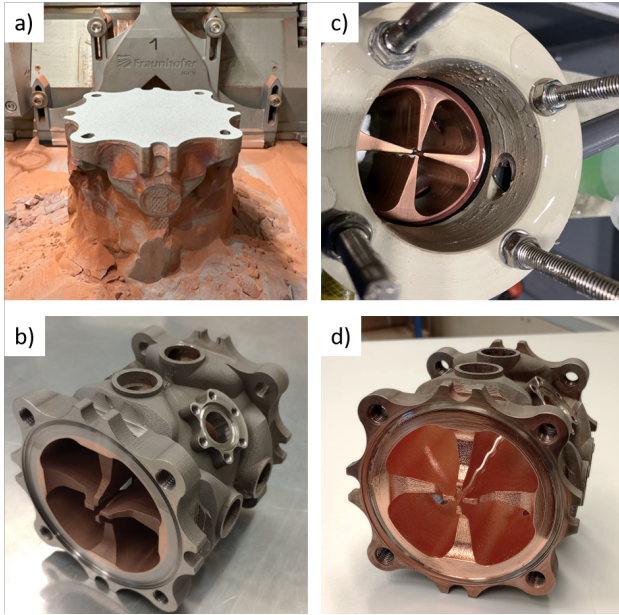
RFQ prototype: (a) after MM PBF-LB/M and still surrounded by powder, (b) after CNC machining of the knife-edge sealing interfaces, (c) during post-processing, and (d) after post-processing.
